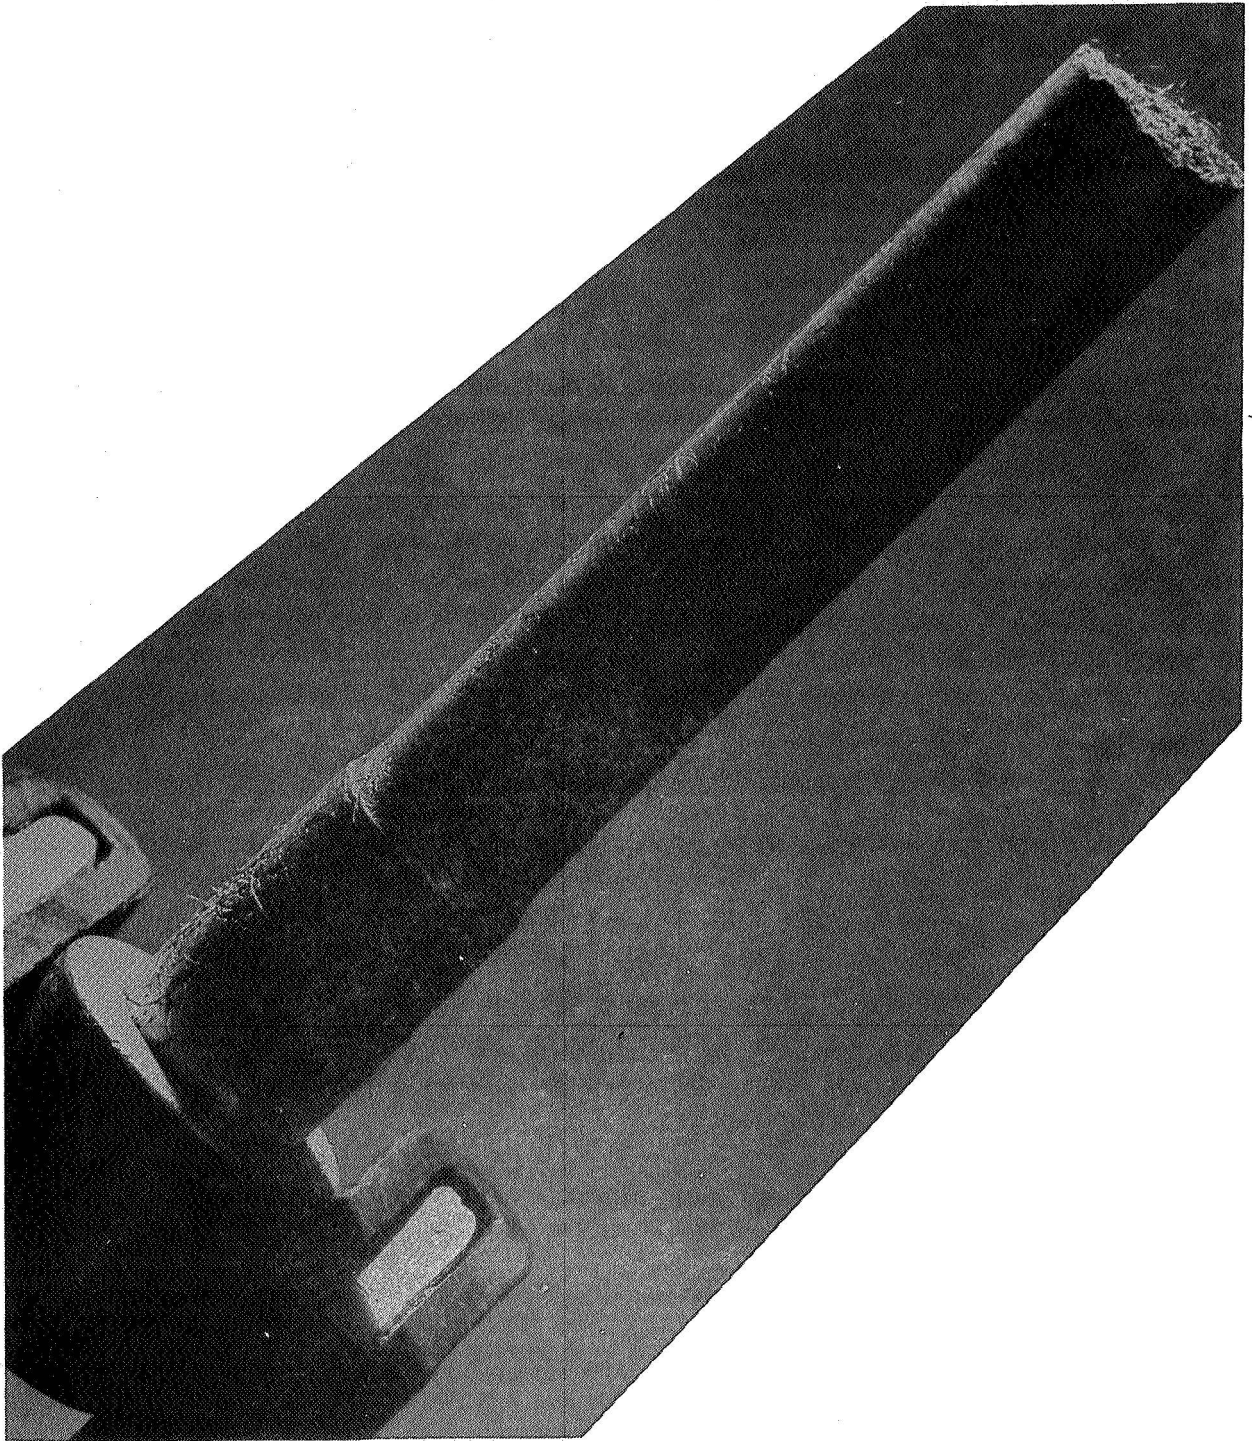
Steel Wire-reinforced Cerrobend Tensile Specimen
